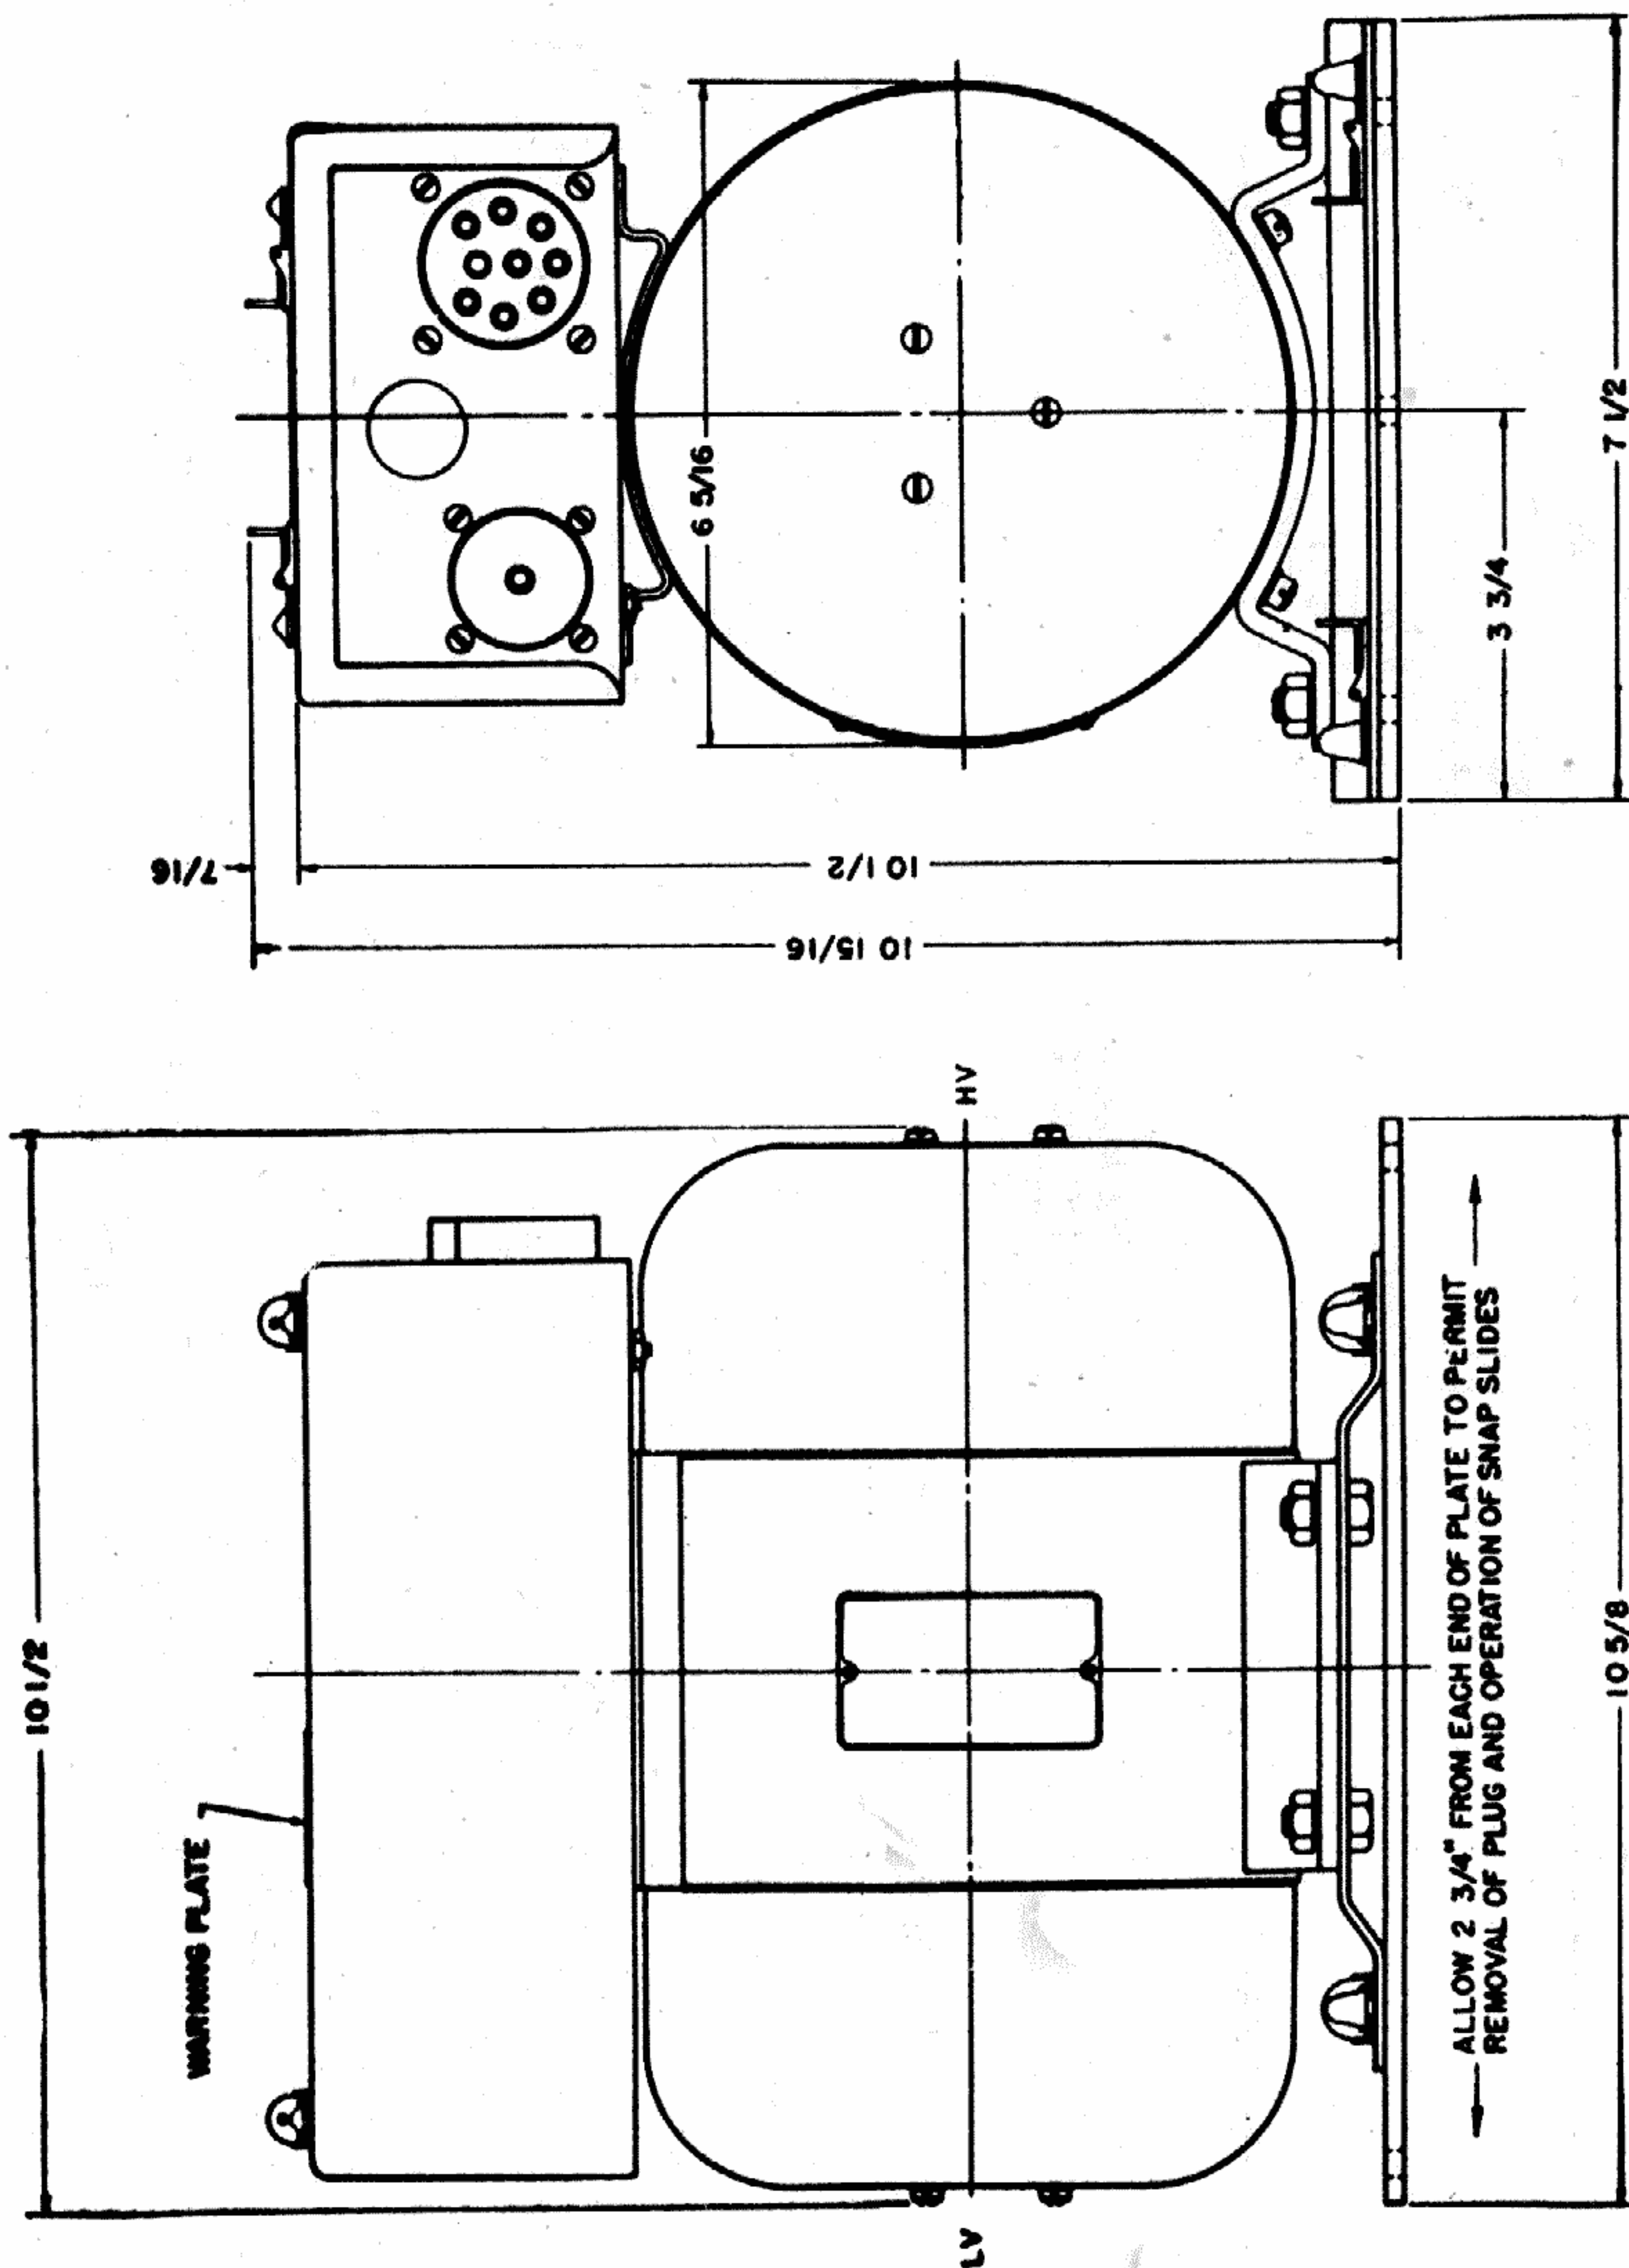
Dynamotor Units BD-77-K and -KM, Outline Dimensional Sketch.
